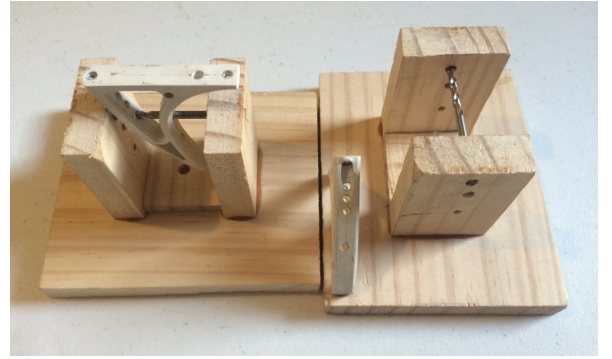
Second test bench. Detail of the supports, shafts and quadcopter's drilled feet.
